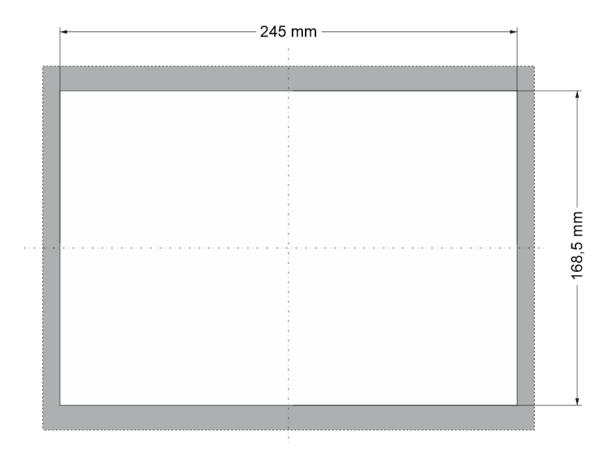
DC-Pi Prime Open 10 mounting cut-out
